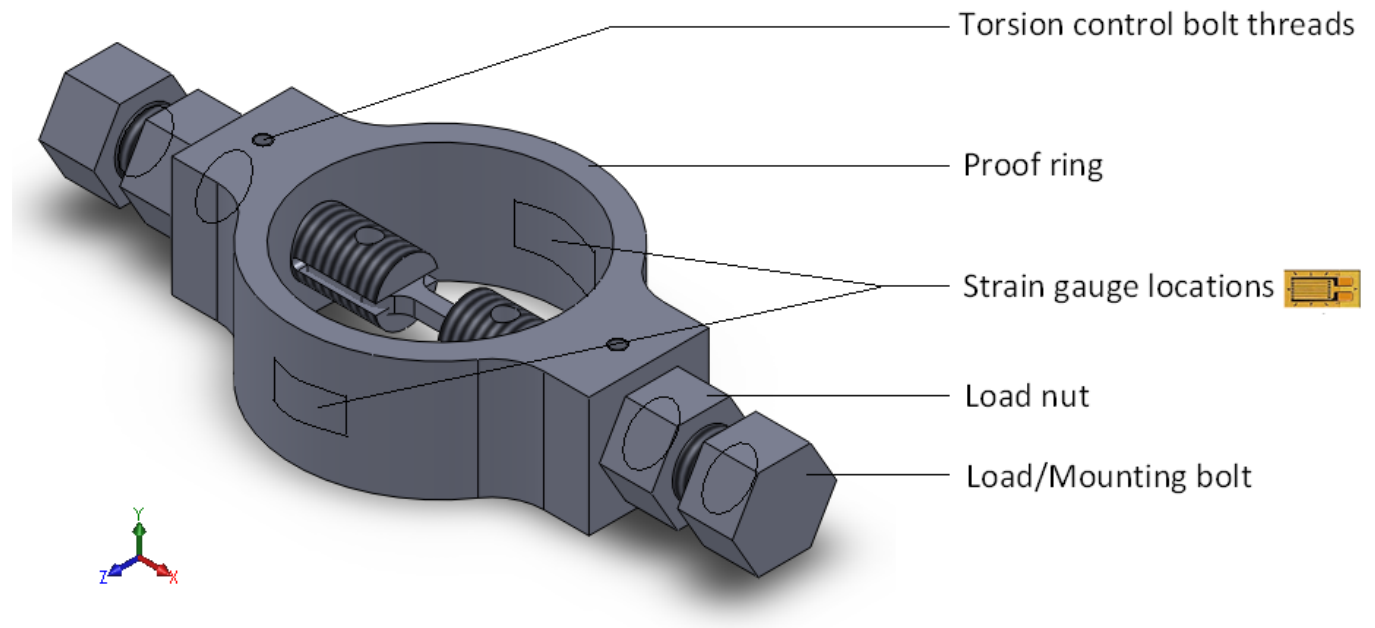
Isometric CAD view of the proof ring with the major design features labelled.
